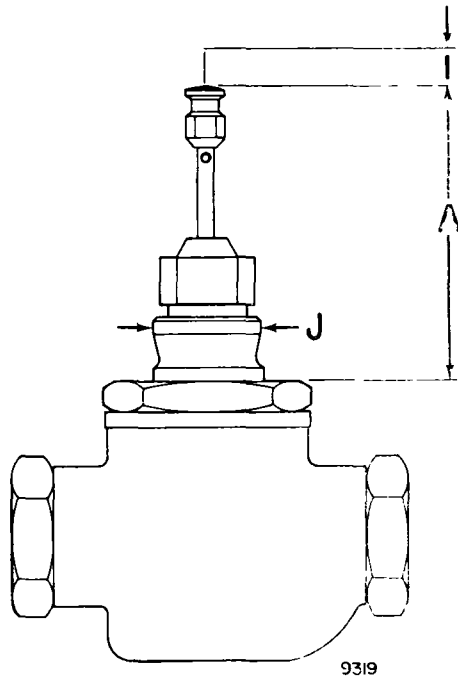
V5011A and C Screwed, Direct Acting Body Dimensions in Inches (Millimeters) Refer to Table 3
